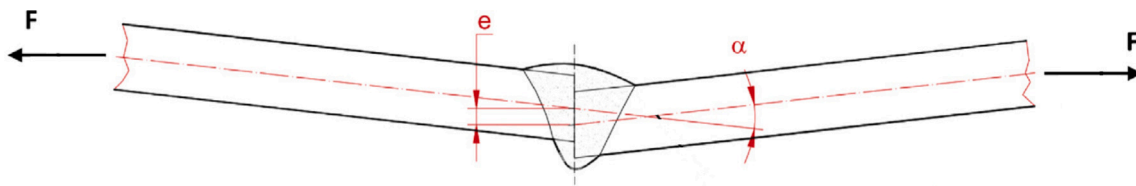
Definition of two types of joint misalignment in butt welded connection [31].
